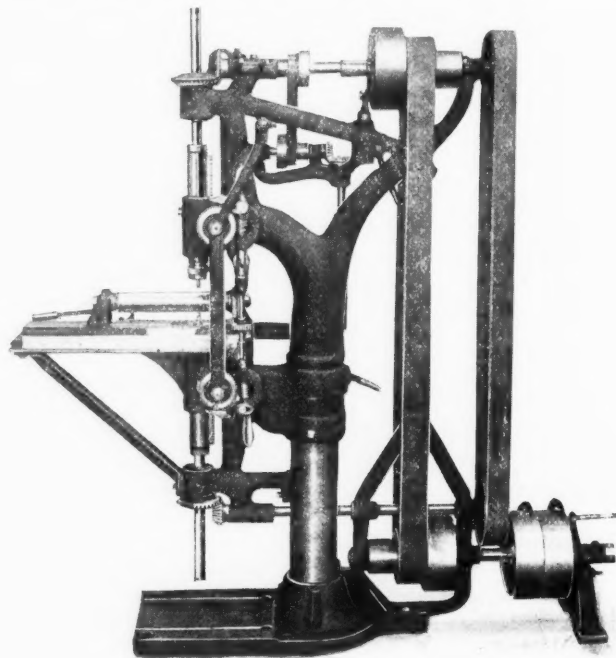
Right Side of the Routing Machine, showing Feeding Motion for Mill Spindles.
